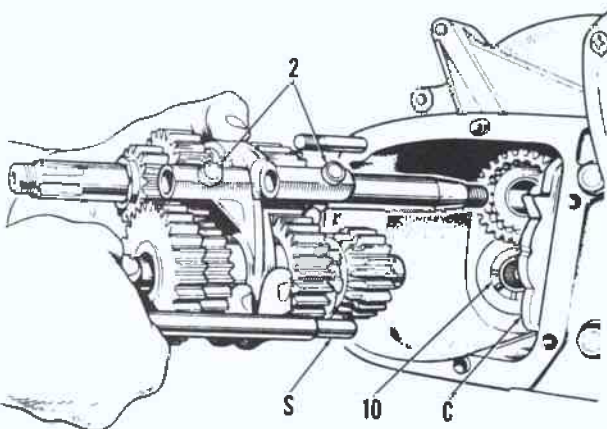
When removing or installing transmission gears, be careful not to lose thrust washer (10) or rollers (2).
